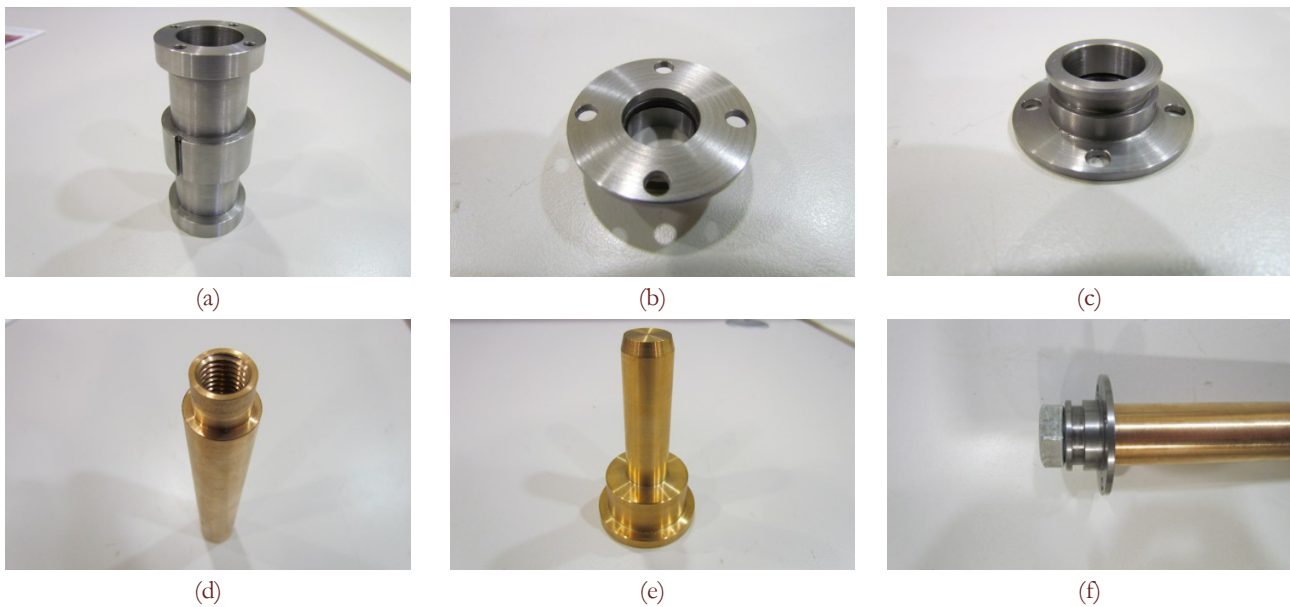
Custom components. Piston head (a), flange (b, c), rod (d) and bottom-rod with end plug (e). Coupling between rod and flange (f).
